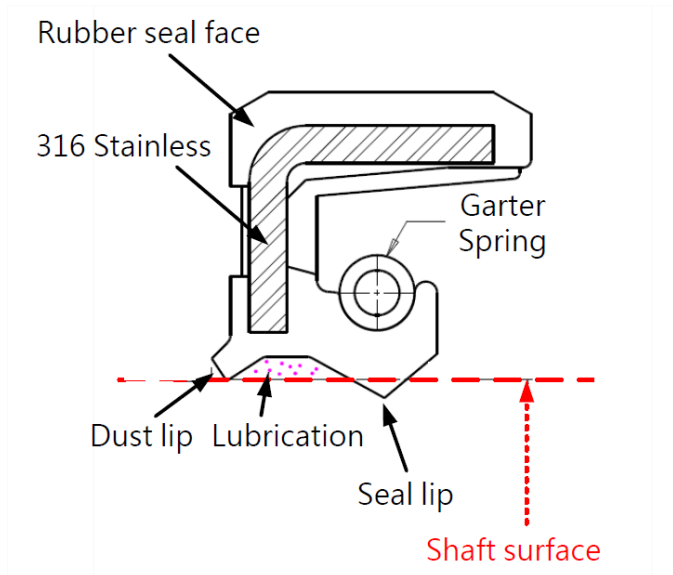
The section diagram of the NAK shaft seal. The shaft seal is mainly made of Fluorocarbon Rubber, and the internal SUS 316 stainless support ring and dust lip are integrated within the seal to enlarge working performance.
